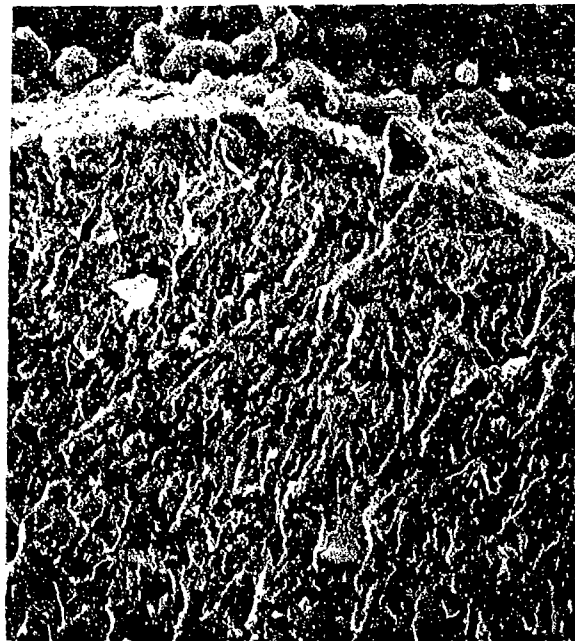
Origin of failure of temper-embrittled AX-110 weldment containing LOP, 1400x.
